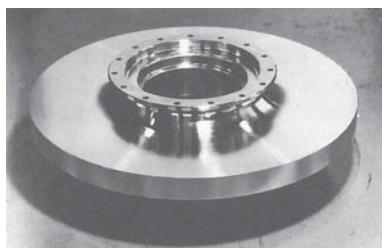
The same as Fig. 3, after machining, to be rotation-tested
